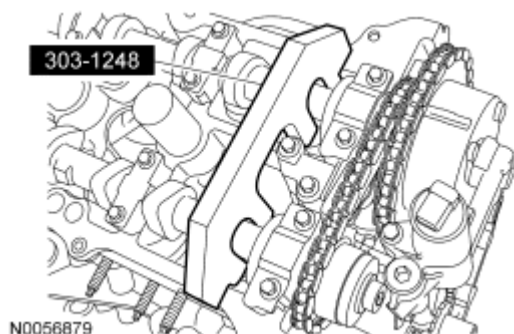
Installing Special Tool (303-1248) Onto Flats Of RH Camshafts
